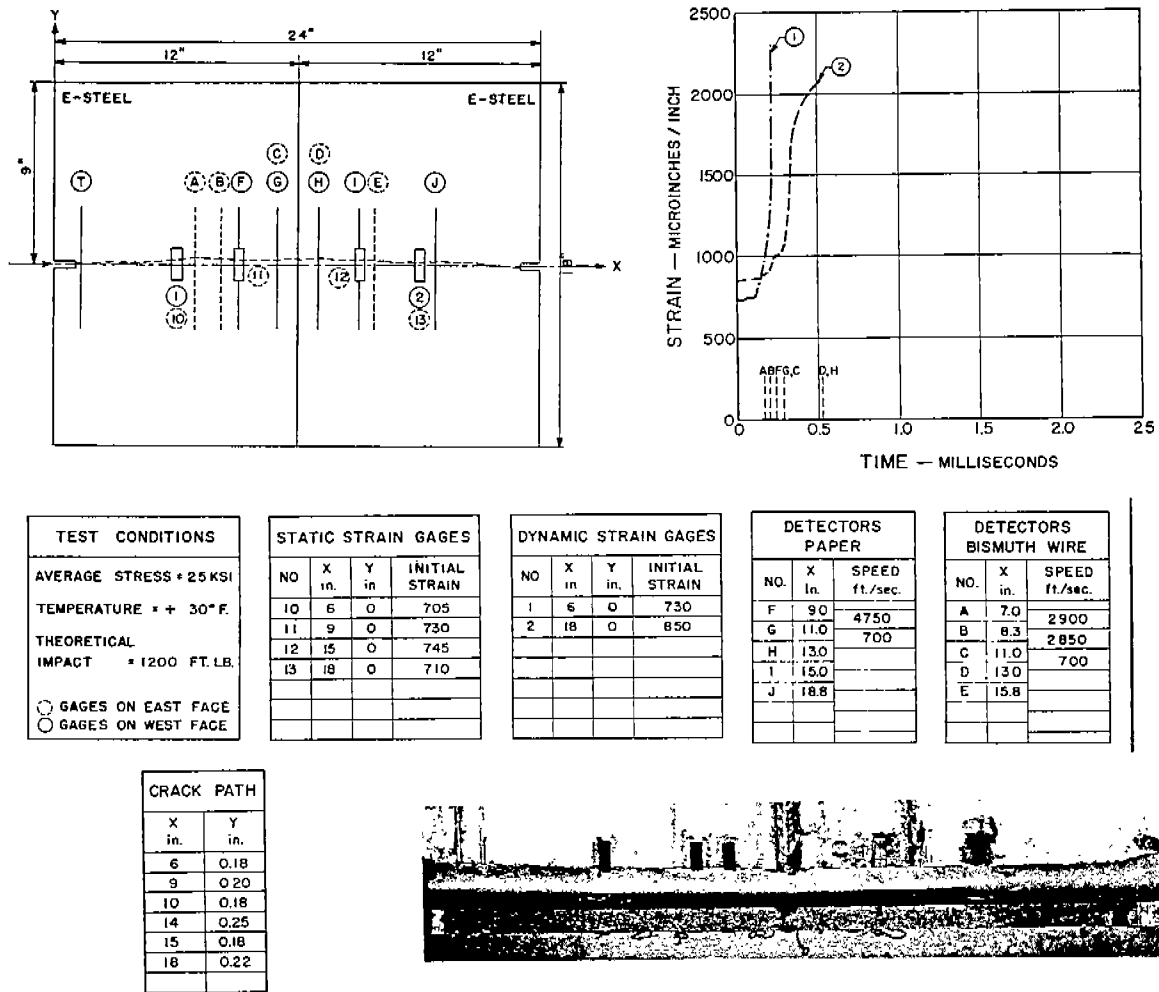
Instrumentation, Record, and Fracture Surface -- Test 3.
